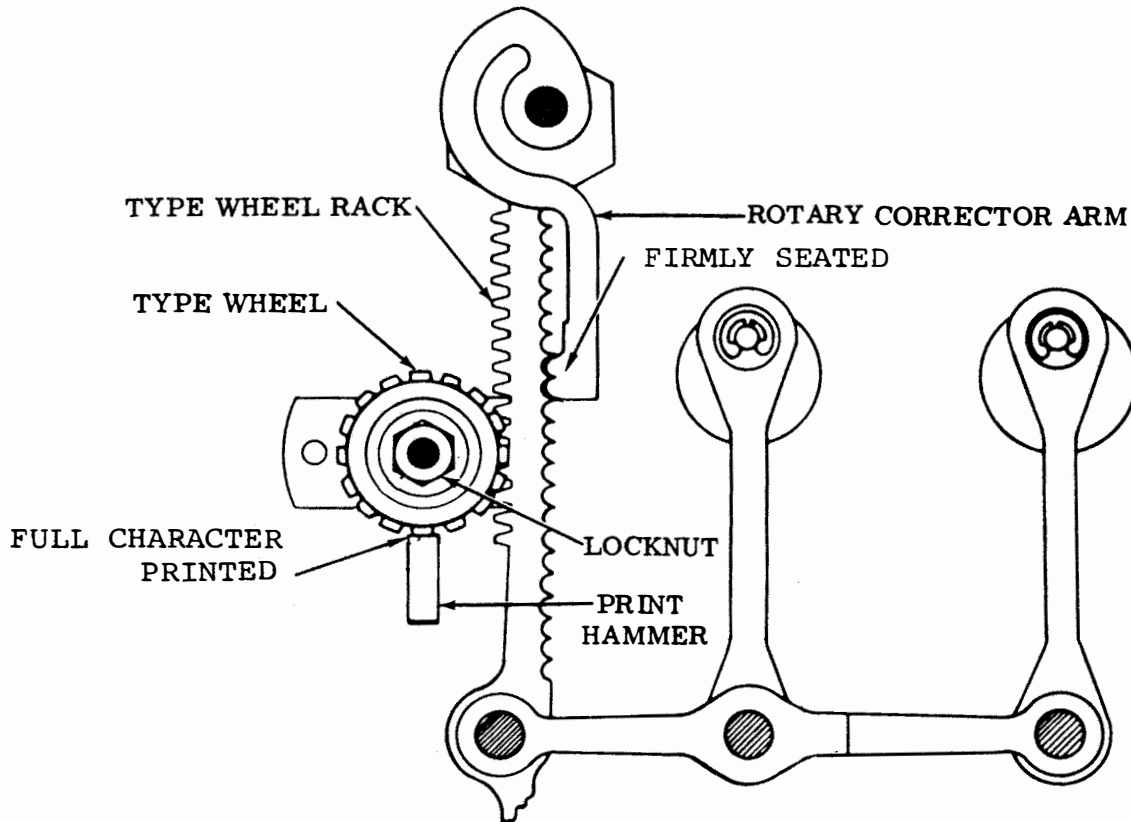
Type Wheel (Preliminary and Final) (For Fully Perforated Tape), Front View
